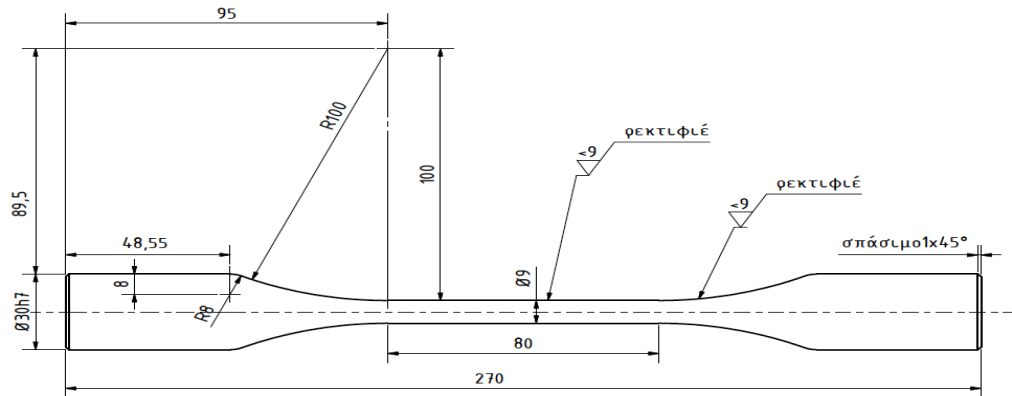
AISI 6150 Fatigue Specimen, dimensions in mm
